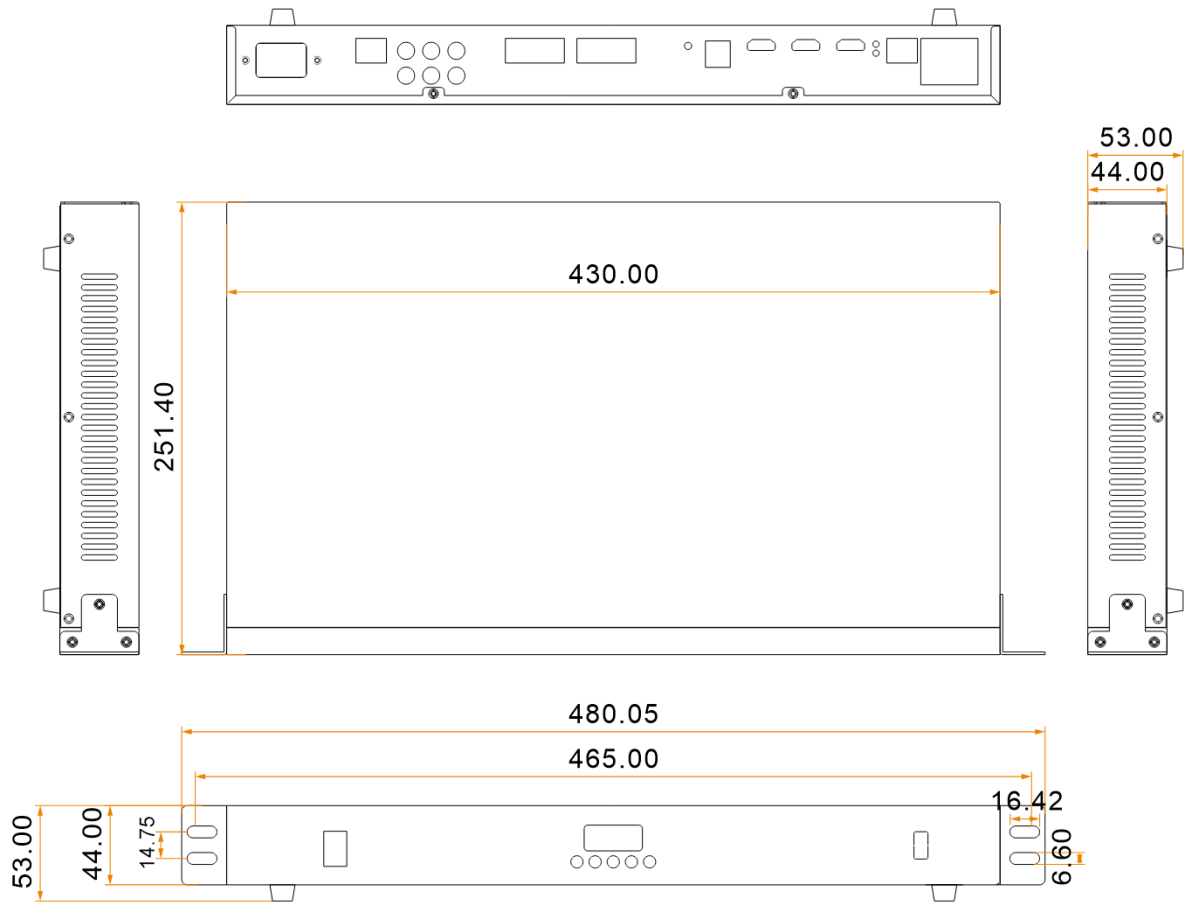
KS204 mechanical drawing. Drawing tolerance: ± 0.3 mm.
